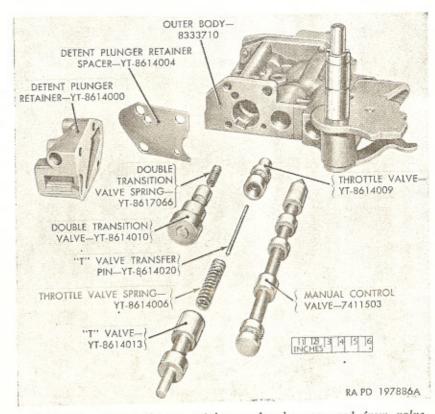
Detent plunger retainer and valves removed from valve outer body.
